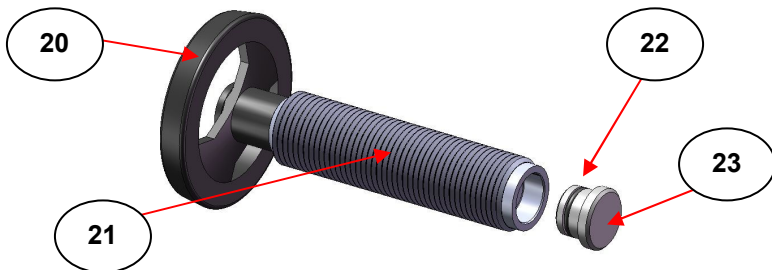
Lead Screw Assembly and Top Bolster Parts of the Press
